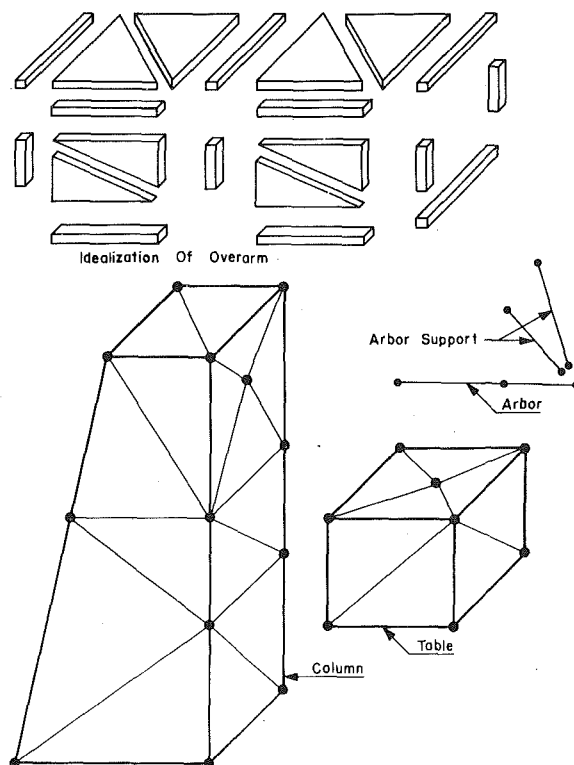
Finite-element idealization of milling machine (shown in Fig. 3)
